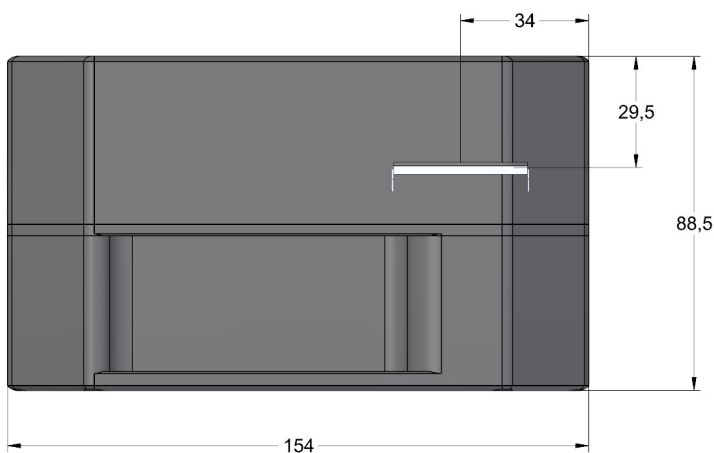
G3 camera with enhanced cooling and internal filter wheel side view
